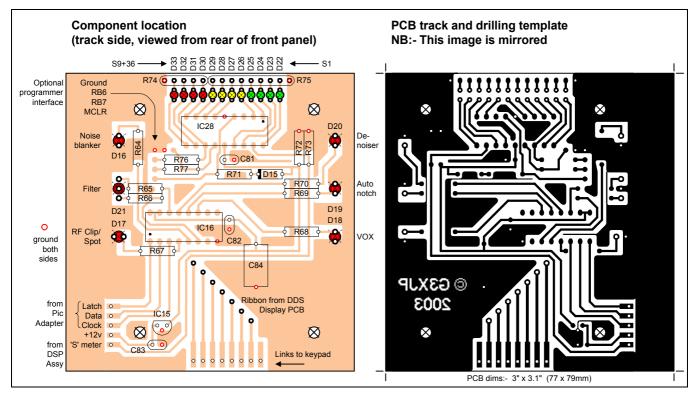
Double-sided Status board PCB with the ground-plane side unetched. The width of this board (3") accommodates that of my RF front-end which sits behind the Status board. All components except the LEDs are surface-mounted on the track side. This allows access to both the components and to the LED pads. The latter is needed to adjust the LED lead lengths for flush-fit to the front panel. The four mounting holes are for the keypad which is mounted using short spacers. The 7-way ribbon cable from the Pic 'N' Mix Display board is routed between this board and the keypad and made off to pads / tracks provided on this board and thence via short wire links to the keypad itself. IC16 and IC28 are mounted in sockets with all pins - except their respective ground pin - cut back for surface mounting. No connectors are specified. The relevant pads have a 0.1" pitch.
